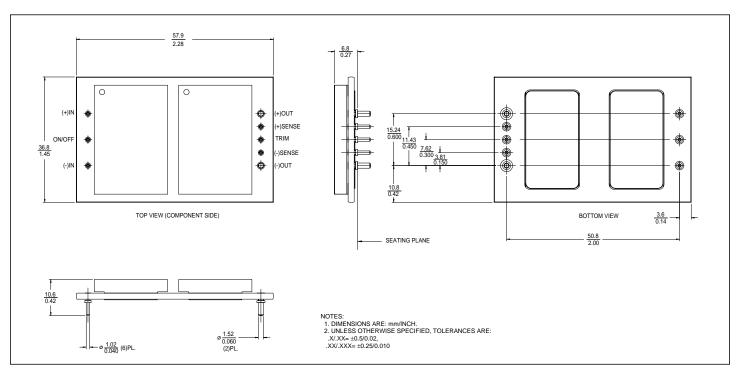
Mechanical outline and PCB footprint information; single output pin version (package style 1)
